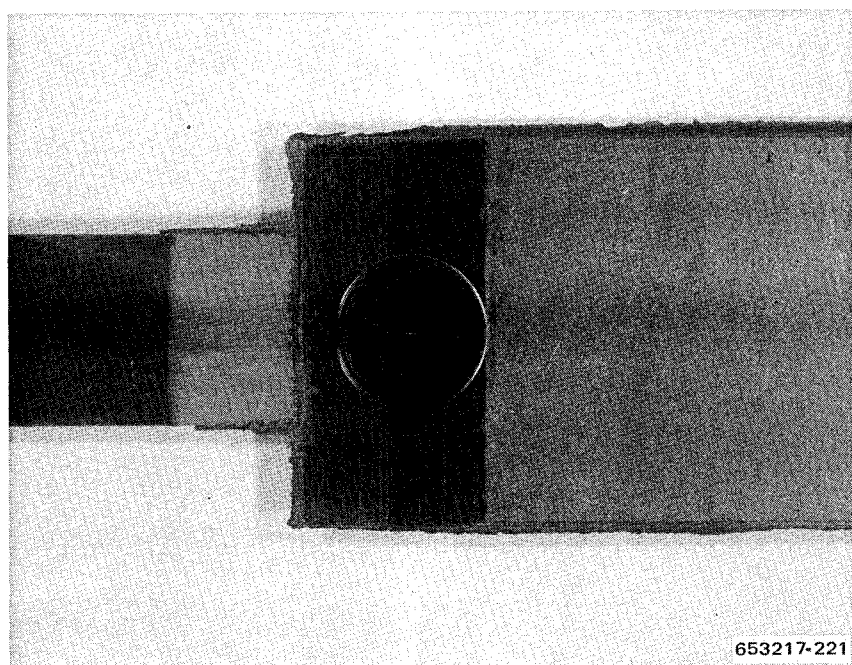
Closeup-View of Tapered Section of Titanium Doubler Showing Flat Area for Attaching Clamp
